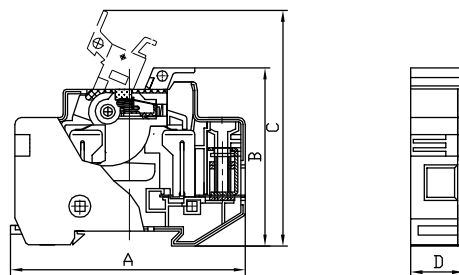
Outline and Installation Dimensions of Fuse Isolator
